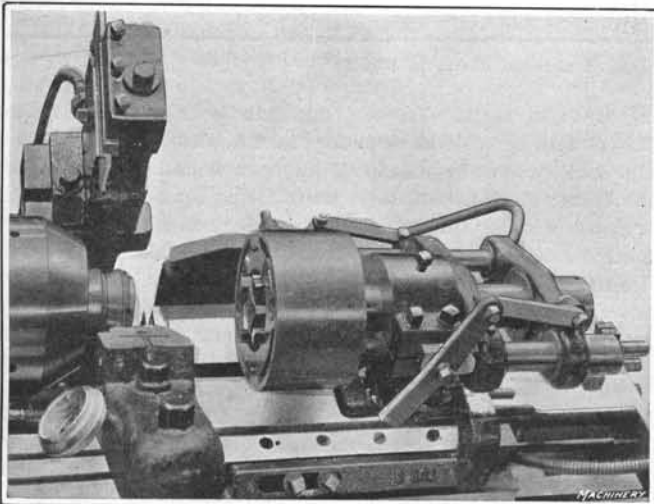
Automatic Die Fixture in Operation on Gridley Automatic Turret Lathe
